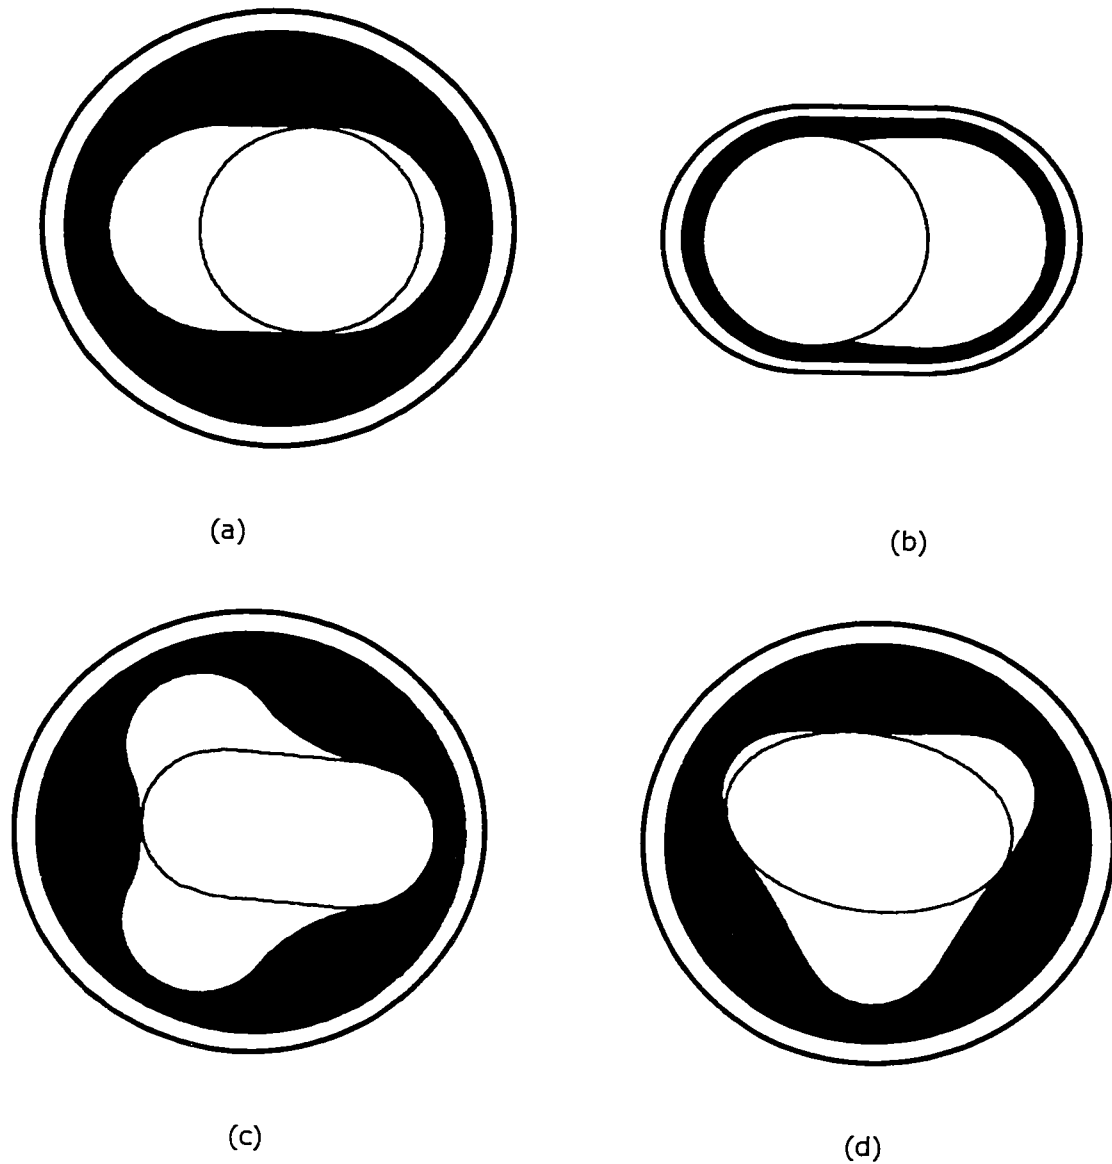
Cross-sections of common pump configurations: (a) Conventional single-lobe; (b) Uniform thickness single-lobe; (c) Conventional 2:3 multi-lobe; (d) Modified 2:3 multi-lobe.
